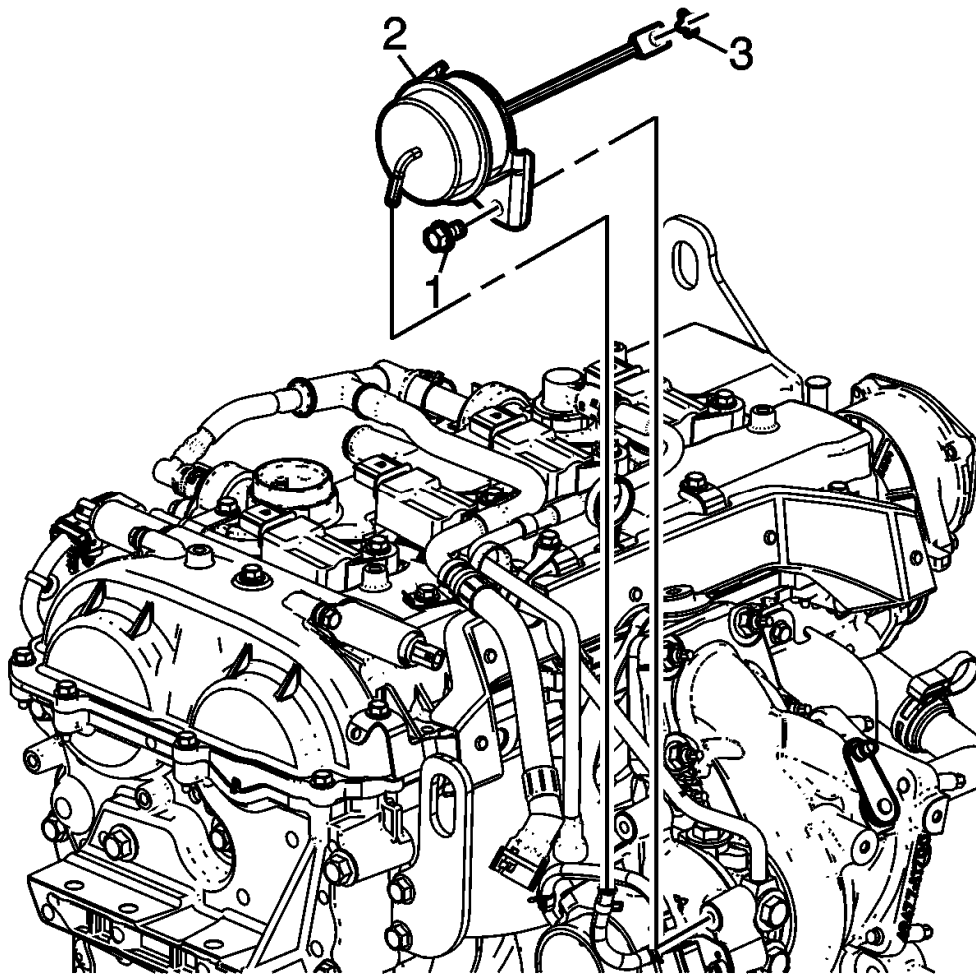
Turbocharger Wastegate Actuator Arm Retainer
